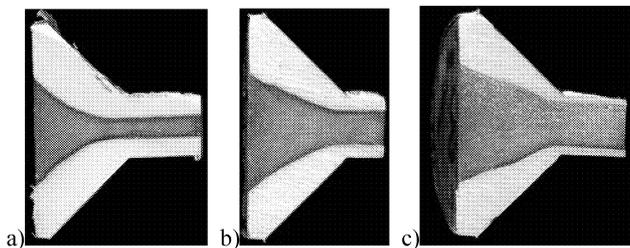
Cross-sections of the end parts of the successive sample extrudates with the coating thickness of: a) 5 mm, b) 3mm c) 1 mm.
